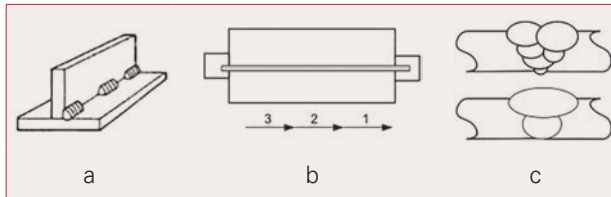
a) Intermittent welding [6]; b) Pilgrim pitch welding; c) Reduction of the number of layers to reduce deformation.
